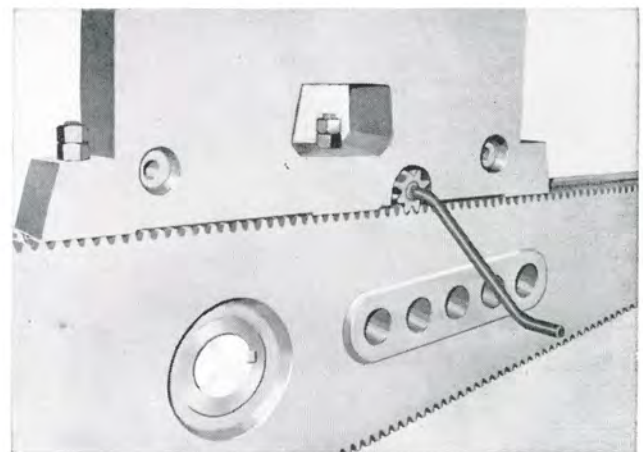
New removable pinion (with crank handle attached) is used to adjust all counterweights.
